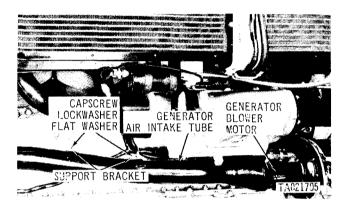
Removing or installing) generator air intake tube, model AVDS-1790-2D engine.
